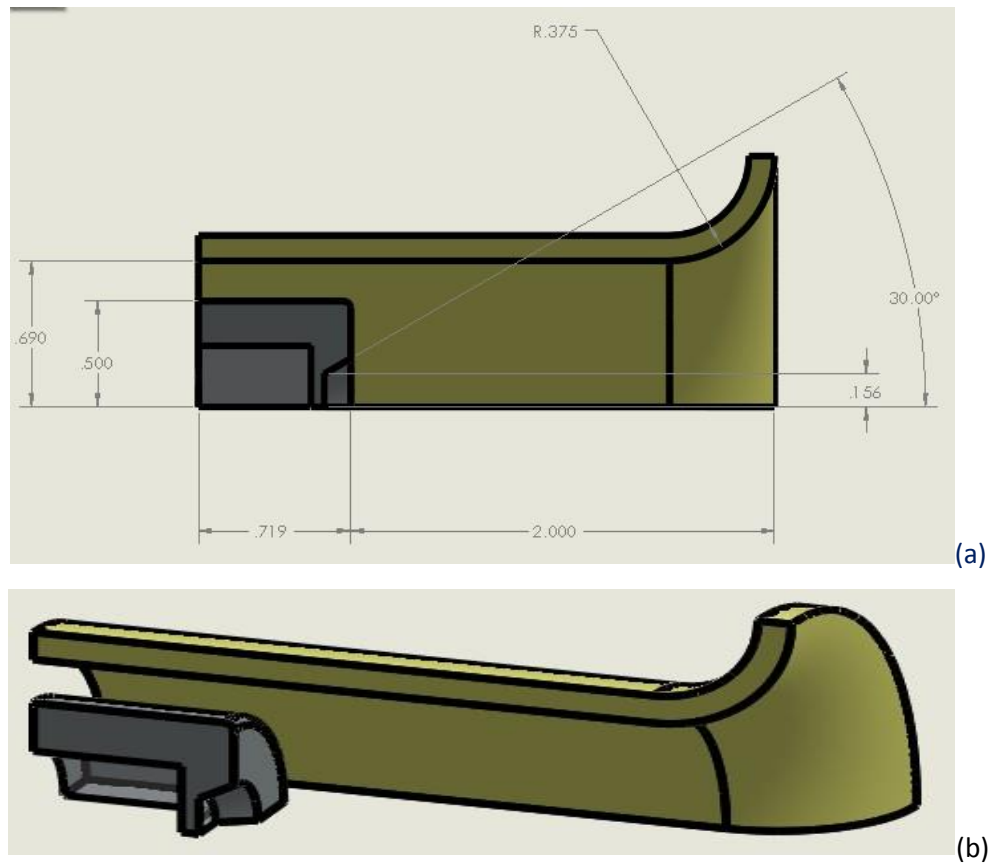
Dimensioned (a) and trimetric (b) drawings of optical system and channel.
